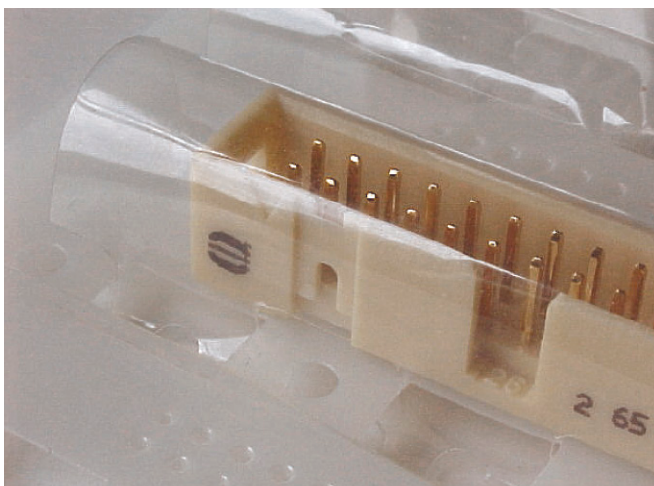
HARTING connector mounted in a tape ready for placement using an odd form assembly station.
